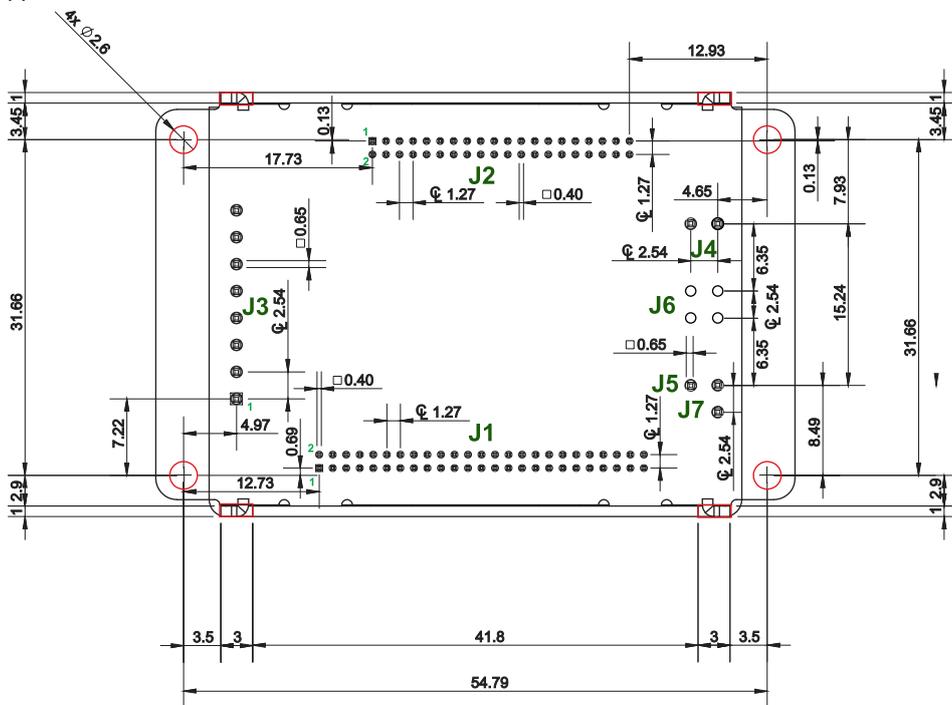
iMOTIONCUBE CAN-STO PCB Footprint
